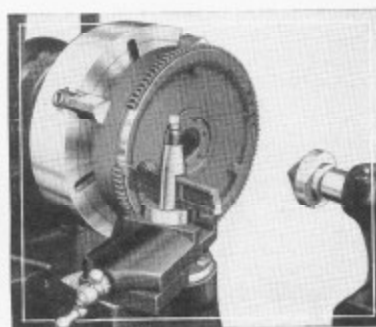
Section of Flywheel Teeth Removed to show the Groove cut under the Teeth by Tool
